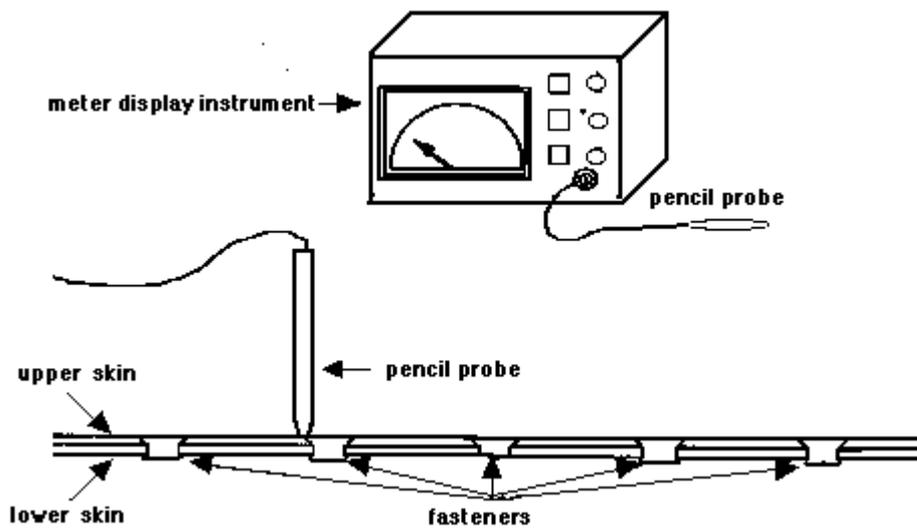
737 aircraft lap splice eddy current crack inspection using free-hand pencil probe technique.
